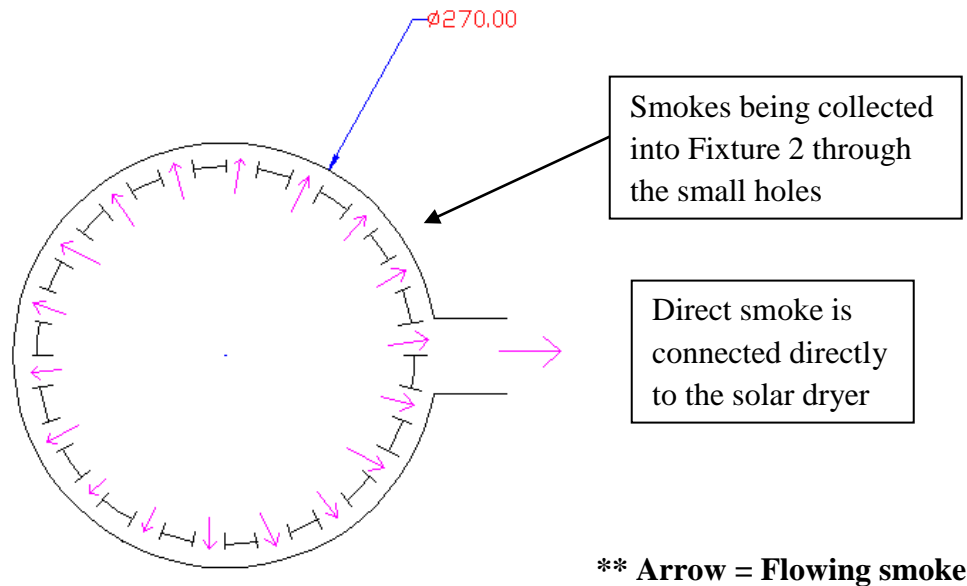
The top view of direct smoke fixture (Fixture 1)
